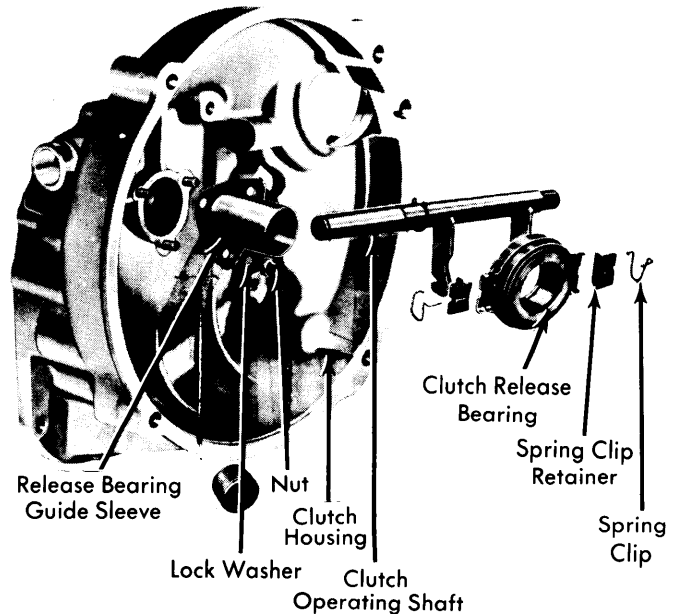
Clutch Release Bearing Assembly (Type 2 Shown)
